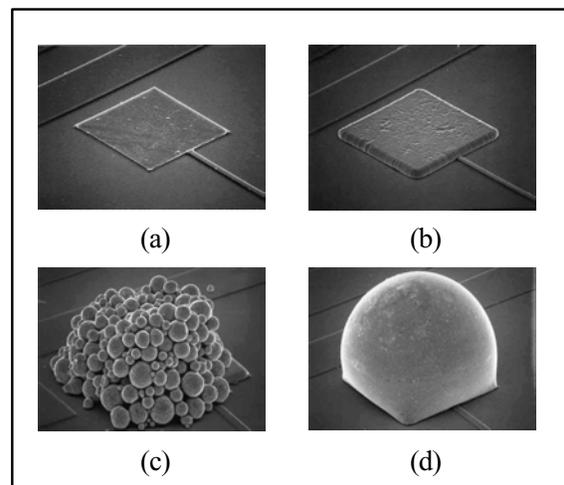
SEM pictures of solder bumping steps (IZM Berlin): (a) bond pad in initial state (b) with Ni/Au UBM, (c) with printed solder paste, (d) after solder reflow.
